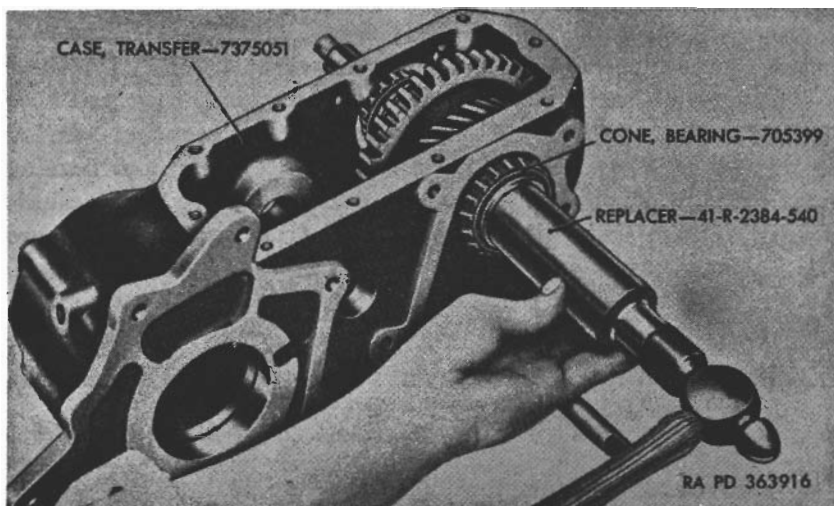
(Superseded) Installing transfer rear axle output shaft inner bearing cone.
